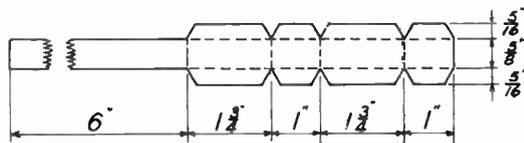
DIMENSIONS FOR MAKING OBLONG CENTRE PORTIONS OF CARDBOARD TRANSFORMER BOBBINS. Width of $\frac{3}{8}$ -in. given is for the two smaller bobbins. For making larger bobbin, this should be enlarged to $\frac{1}{2}$ -in.
